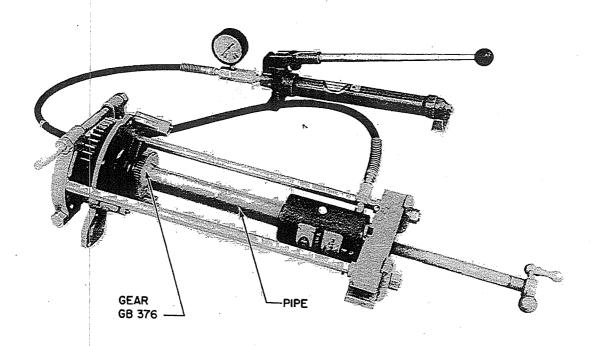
1 to 1 Shaft, Installation of Gear GB376
